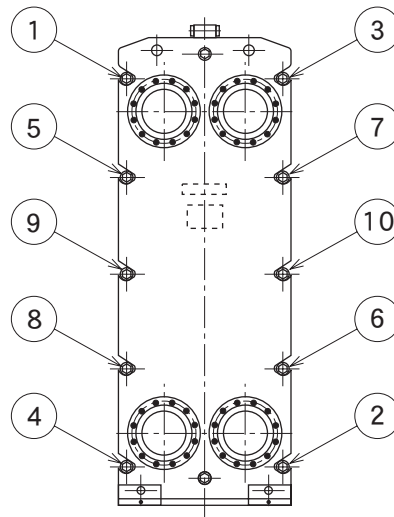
Tie Bolt Nuts Unscrewing Sequence
